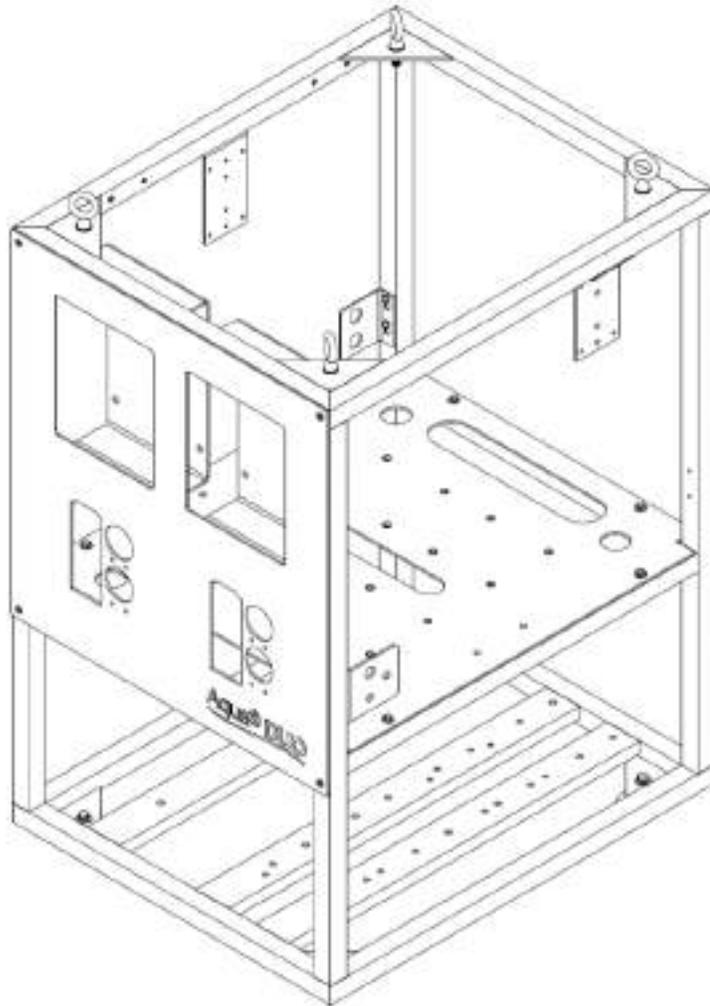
Optional Media Filter Assembly (MMF-1 & MMF-2)
